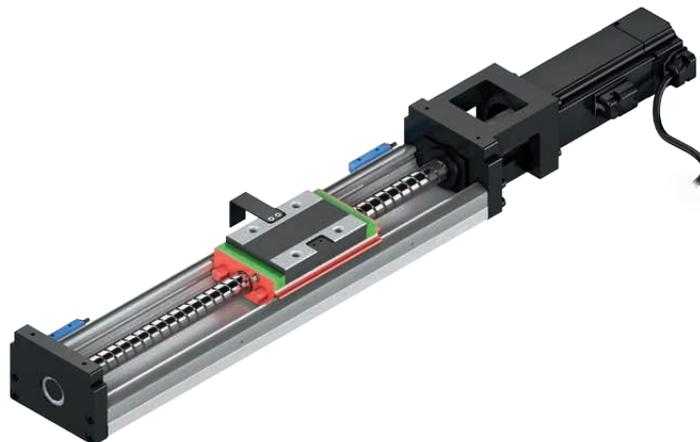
KK linear axis with HIWIN servo motor and motor brake
